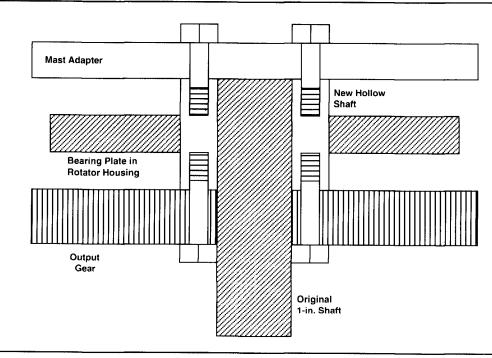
Improving existing rotator designs would involve use of 2-inch output shafts and proper use of bolts.
